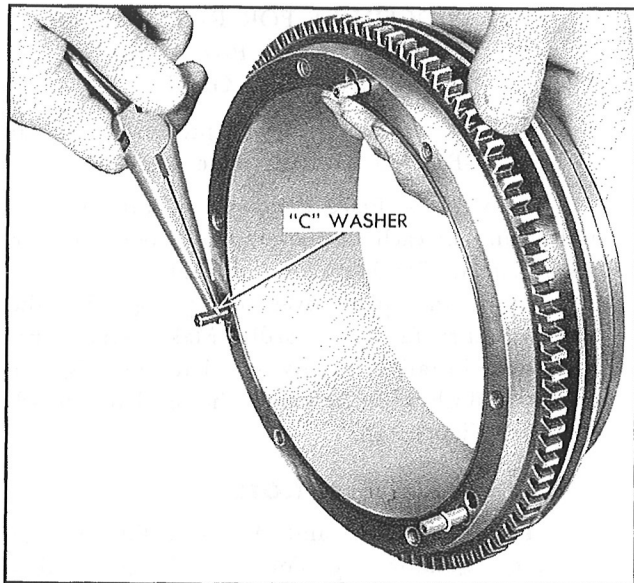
Disassembly of Regulator Gear, Models A632S-B1, -B5, and -C1
